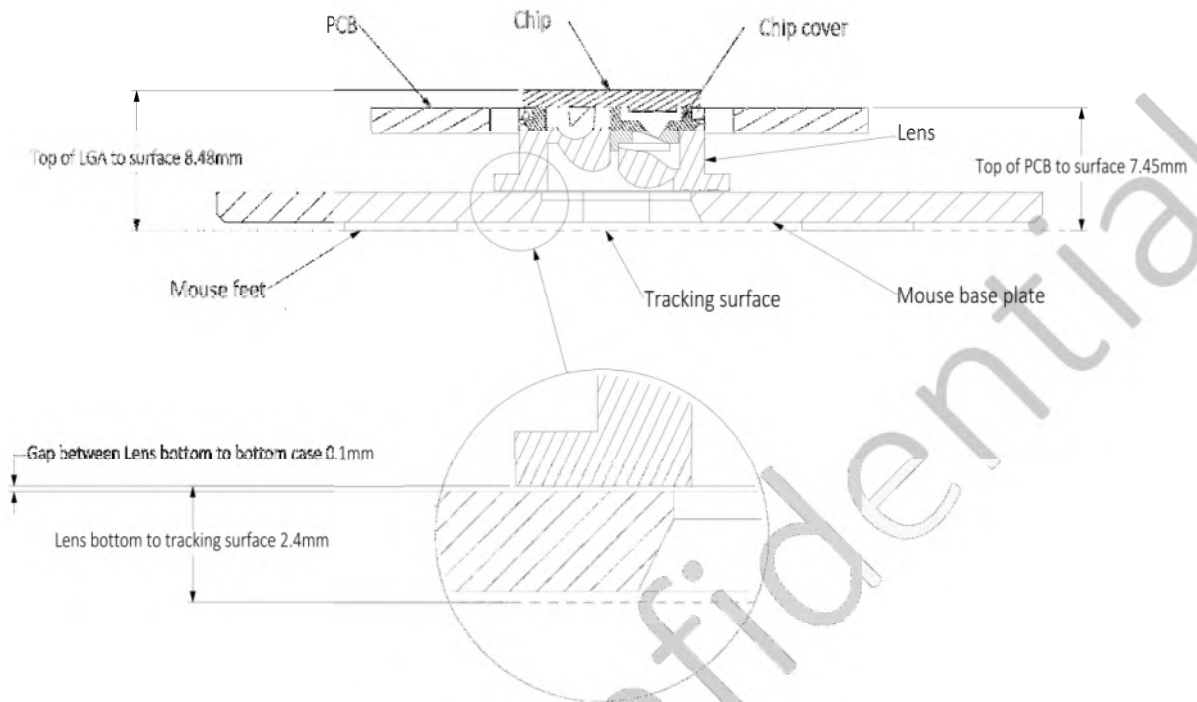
2D Assembly of Chip, Lens, PCB and Base Plate
